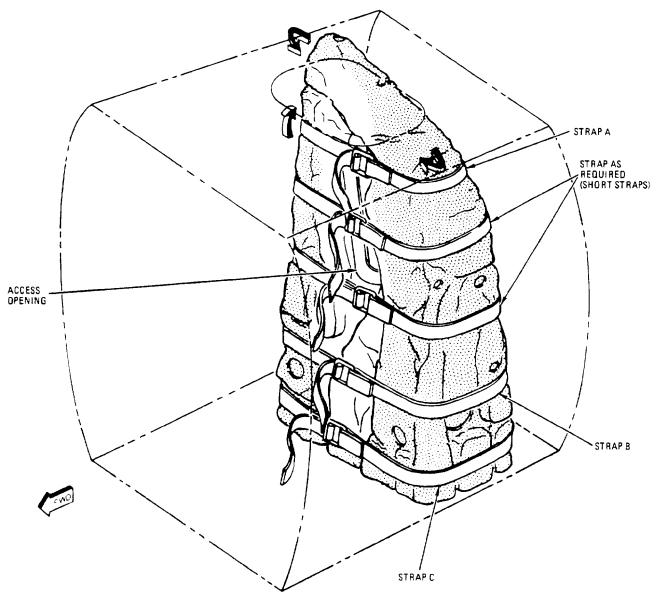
Removal - No. 2 Fuel Tank Folding (Sheet 7)
